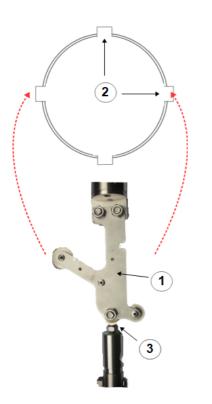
A opposite demonstrates how the wheel assembly fits into a circular sensor casing.
